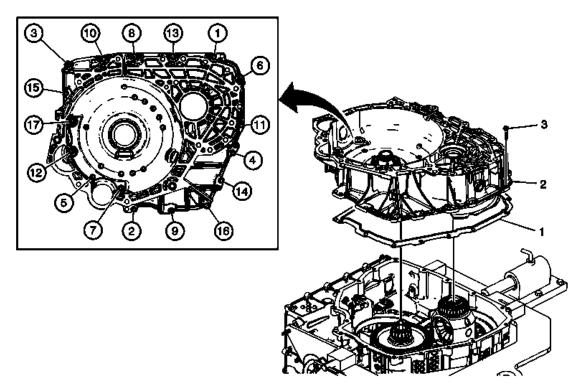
Identifying Front Differential Carrier Assembly Courtesy of GENERAL MOTORS COMPANY
